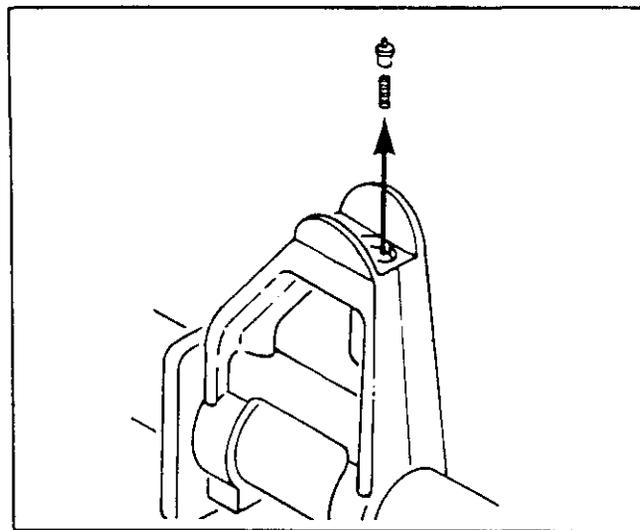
FRONT SIGHT POST DISASSEMBLY
